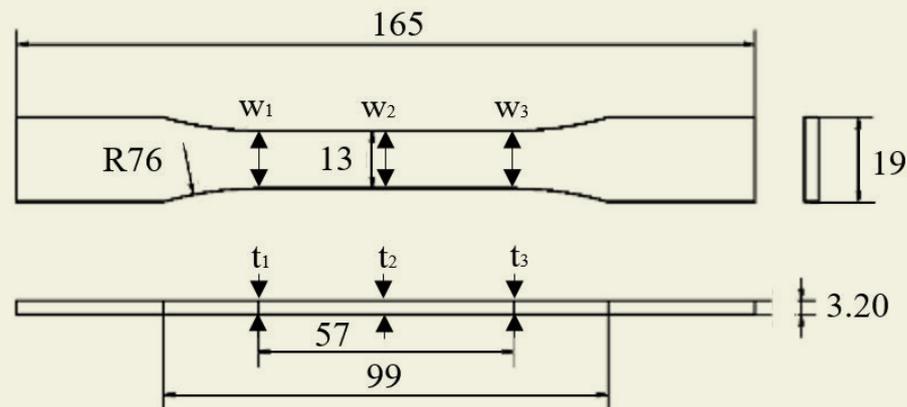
The CAD geometry of the printed samples with the positions of the dimensional accuracy measurements (w_1 , w_2 , w_3 -width measurements; t_1 , t_2 , t_3 -thickness measurements)
